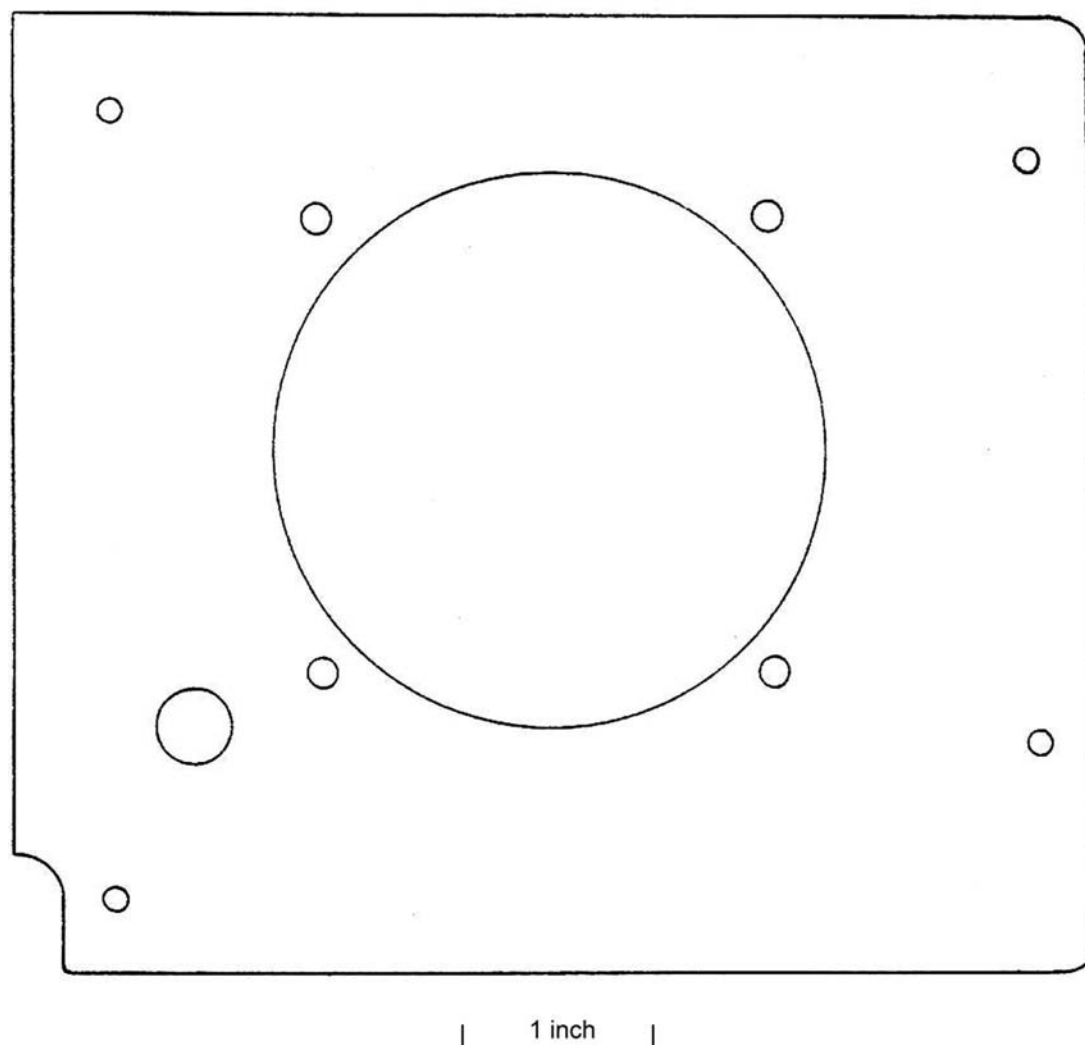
Fig. D. Socket - Template for aluminum plate, Plate (0.050 inch thick) to cover Template original fan cutout on back panel. This template is full-size when printed so that cutouts are round and 1-inch scale on drawing measures 1 inch on print.
